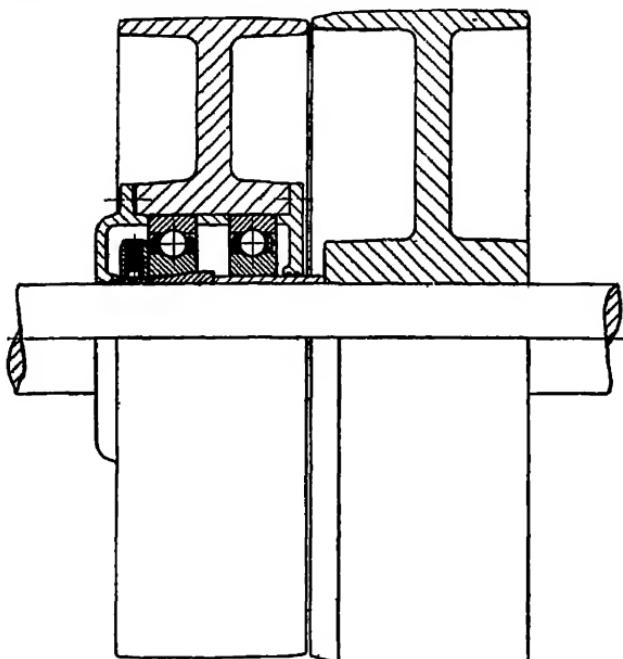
FAST AND LOOSE PULLEYS SHOWING TAPERED SLEEVE BALL BEARING HOUSING
